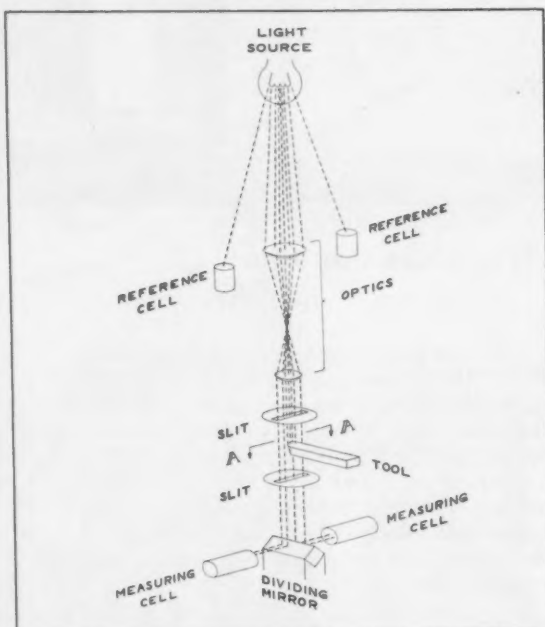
Diagram of Tool-Tronic sensing head and tool illustrating operating principle
